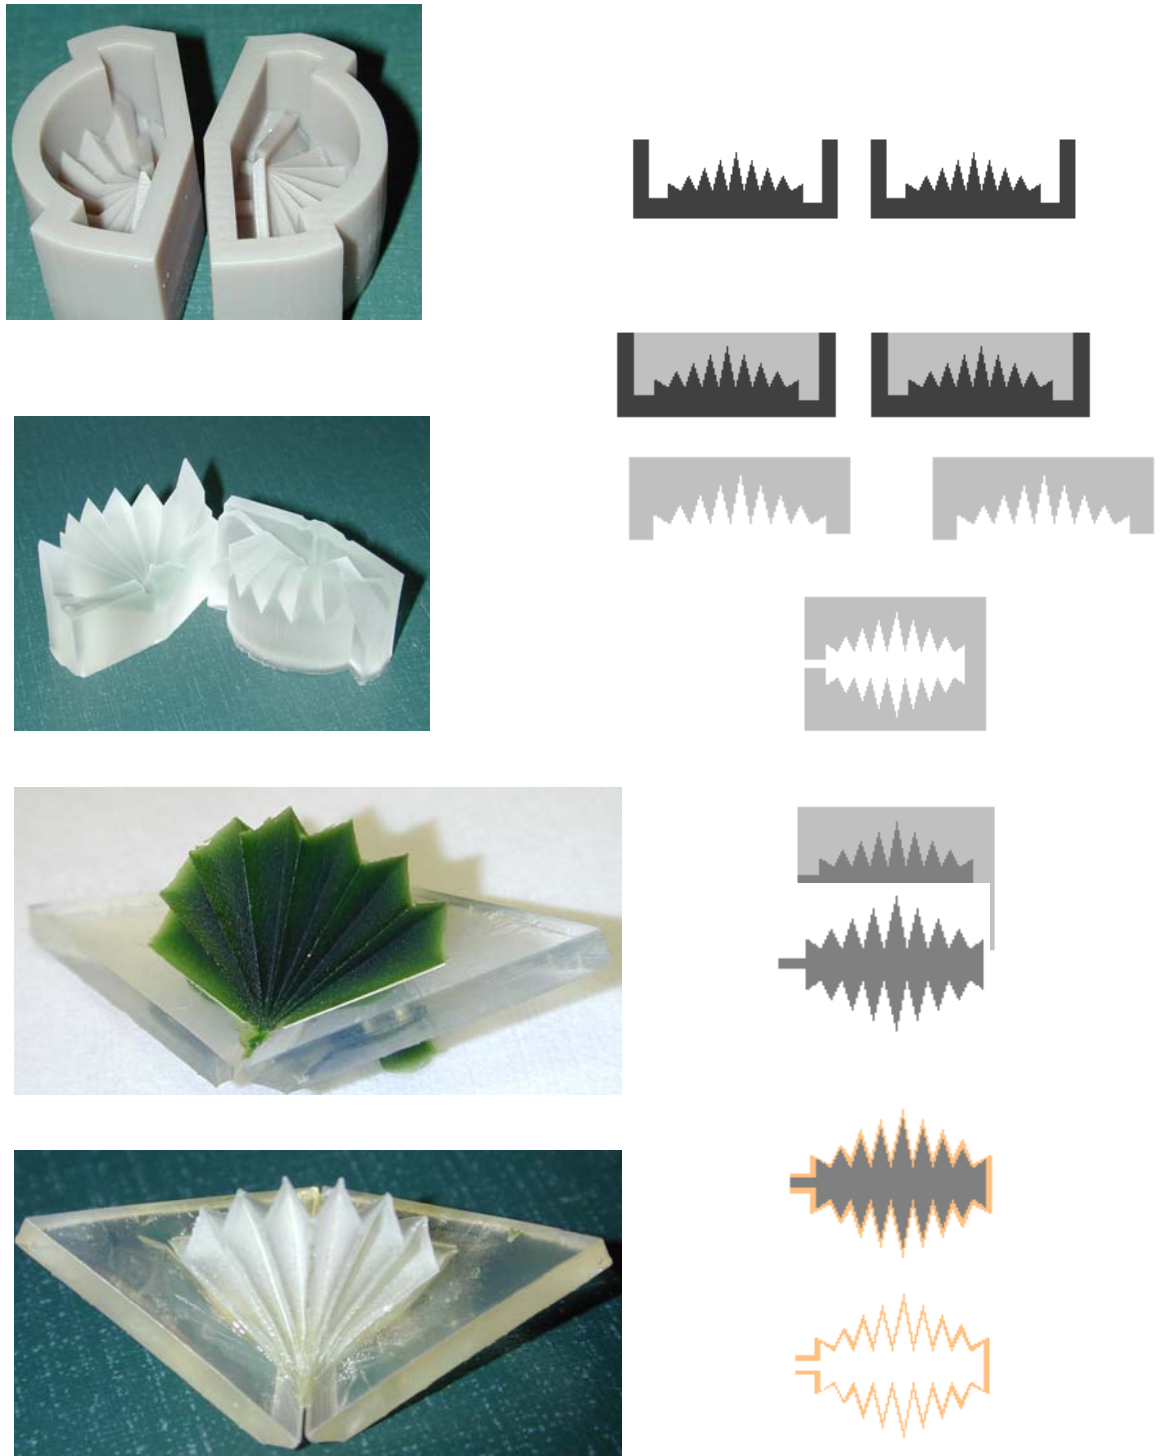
Fabrication process of bubble actuators: 1) Corrugated mold made with wax; 2) Transferred PDMS mold; 3) Cast sacrificial materials; 4) Remove sacrificial material after parylene coating.
